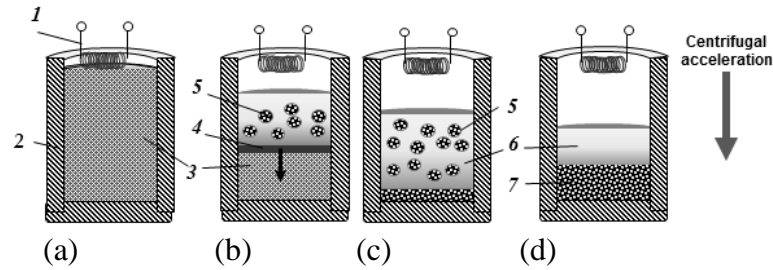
Flowsheet of the process for fabrication of cast HEAs: (a) charge preparation, (b) combustion, (c) phase separation, (d) patterning: 1, igniting coil; 2, refractory mold; 3, green mixture; 4, combustion front; 5, alloy globules; 6, oxide melt; and 7, cast HEA.
